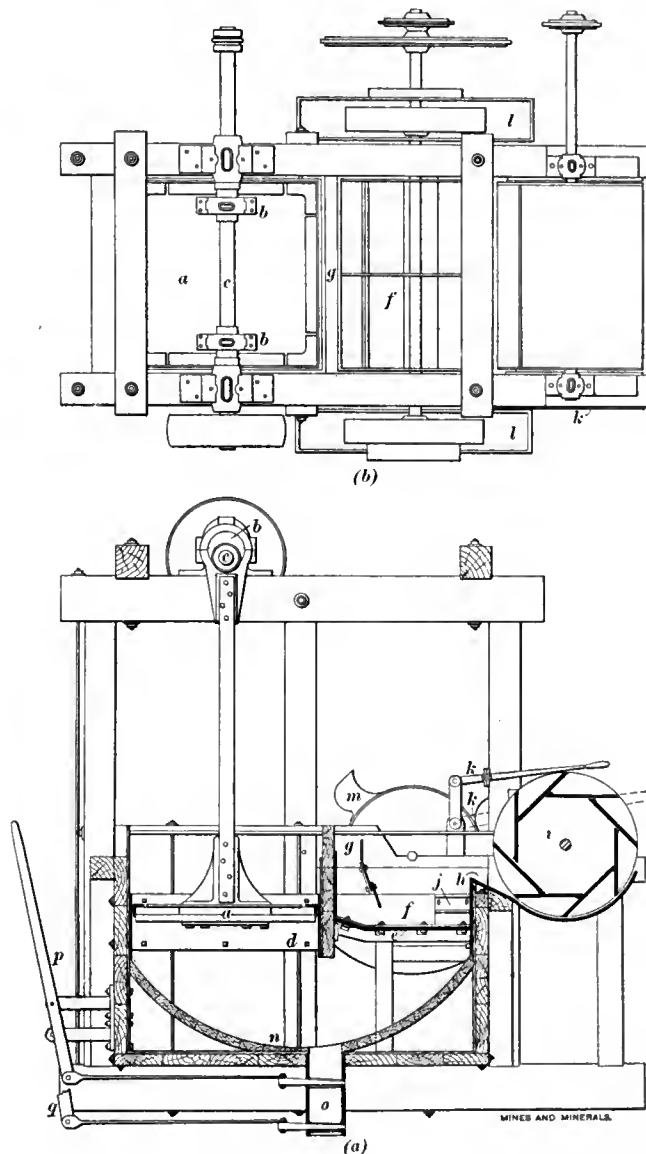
PLAN AND ELEVATION OF HAZLETON JIG
